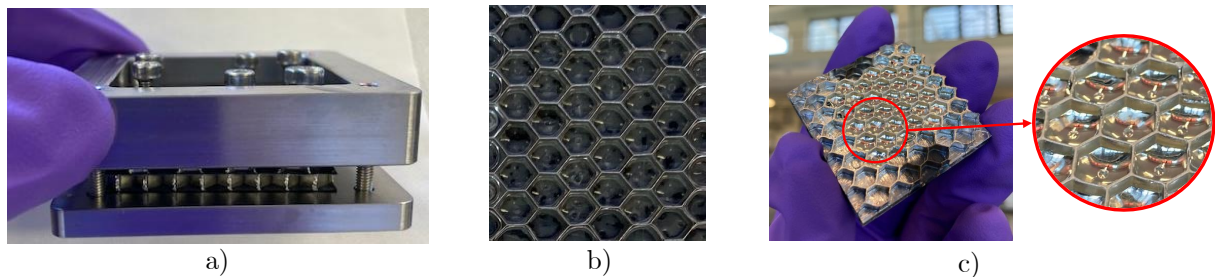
Prototyping of a 30-unit module ($40 \times 40 \text{ mm}^2$ enclosure): a) Molding process, b) Molded optics, c) Module with reflective silver coating
